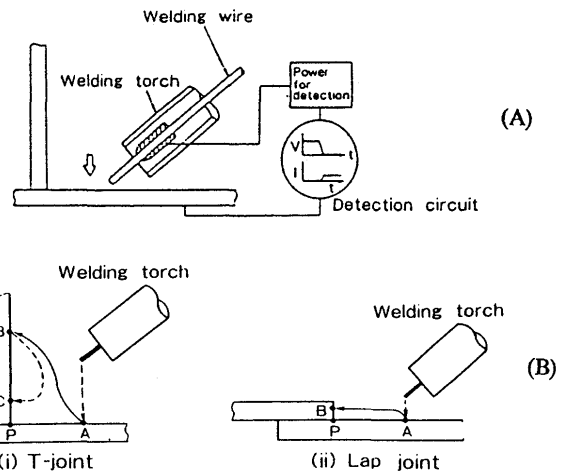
Principle of contact-type sensor (A) and detecting of weld lines (B).
